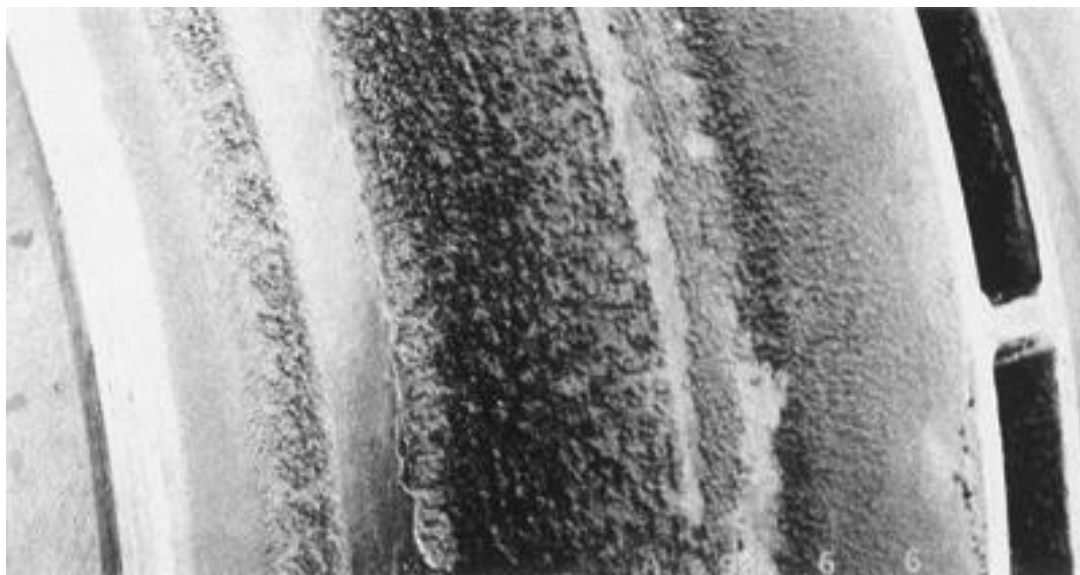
B. Impeller fouling of a centrifugal compressor [Ref.60]
